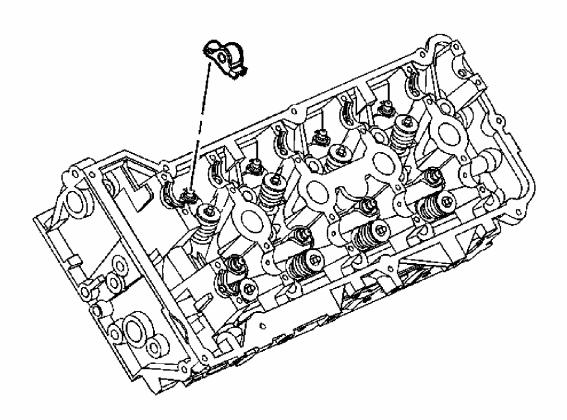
Identifying Camshaft Followers Courtesy of GENERAL MOTORS CORP.
